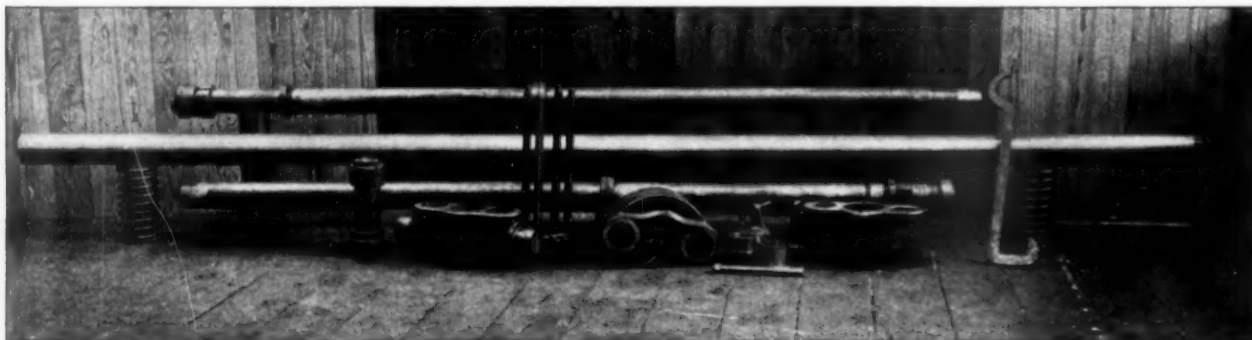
PARTS OF SIMS-DUDLEY PNEUMATIC GUN BEFORE ASSEMBLING.
